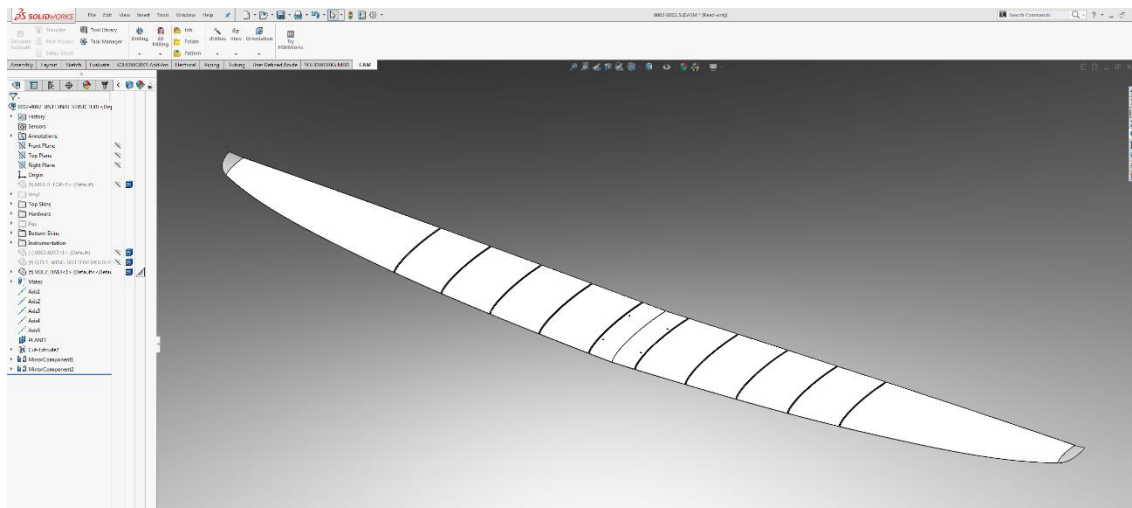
The Solidworks sub assembly of ASE flexible wing.
